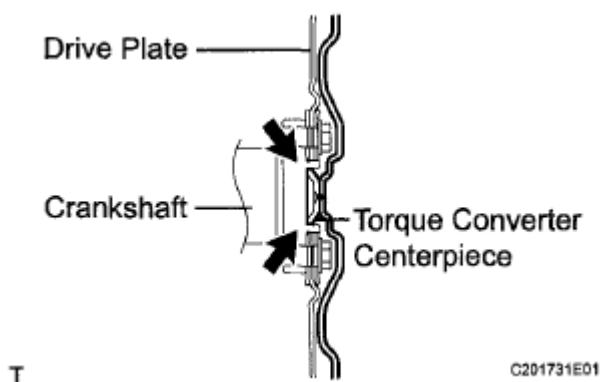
Locating Drive Plate, Crankshaft And Torque Converter Centerpiece
